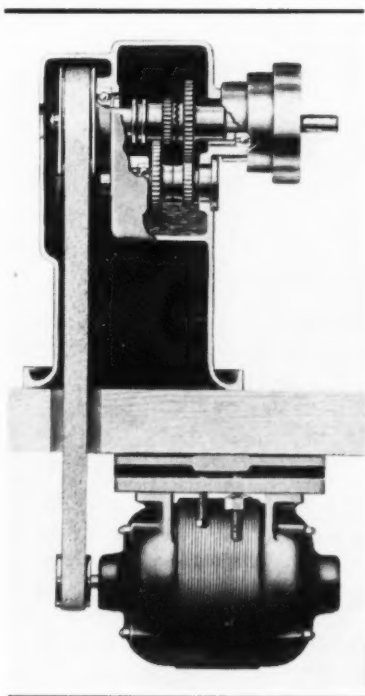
P & W Motor Drive with Two-speed Gear-box
